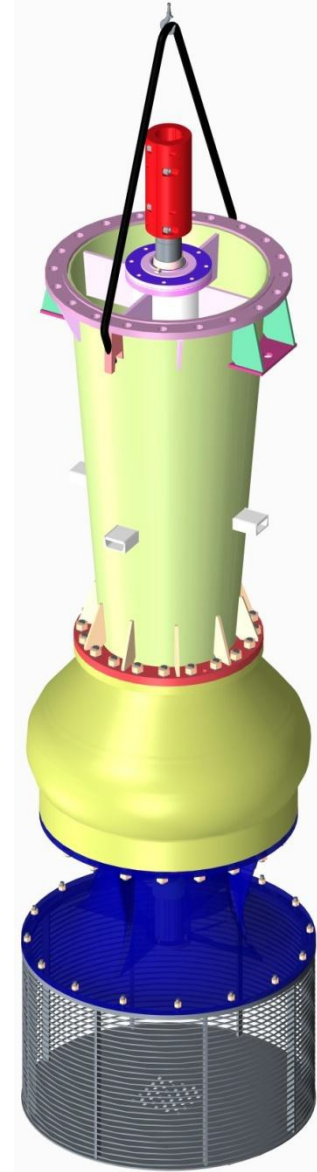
Lifting the Bowl Assembly of Large Sized Pumps
